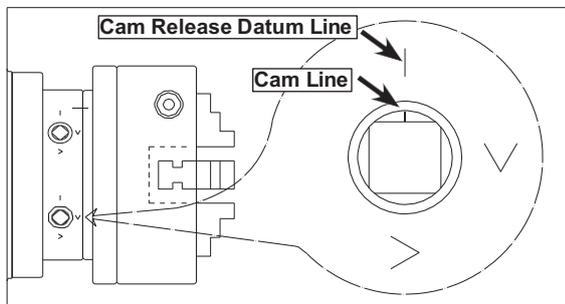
Camlock loosened with the cam line aligned with the datum line.
